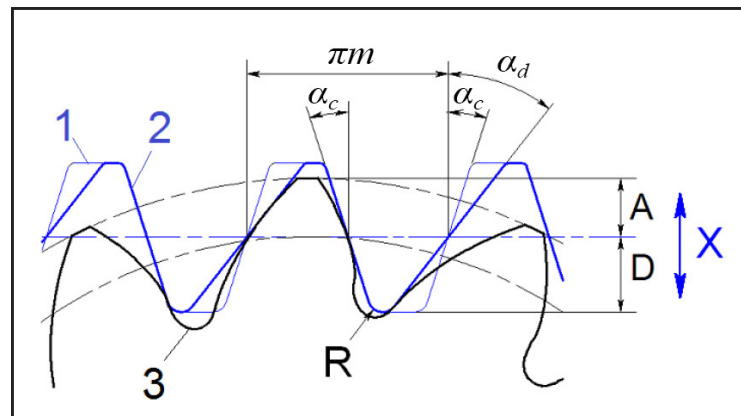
1) – initial standard symmetric generating rack; 2) – modified asymmetric generating rack; 3) – gear profile; A – gear addendum; D – dedendum; X – addendum modification (X -shift); R – rack tip radius; m – module; α_d – drive profile (pressure) rack angle; α_c – coast profile (pressure) rack angle.
